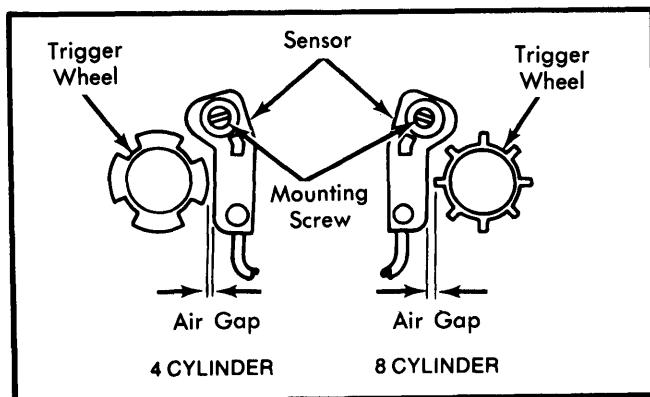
Checking Trigger Wheel-to-Sensor Air Gap
